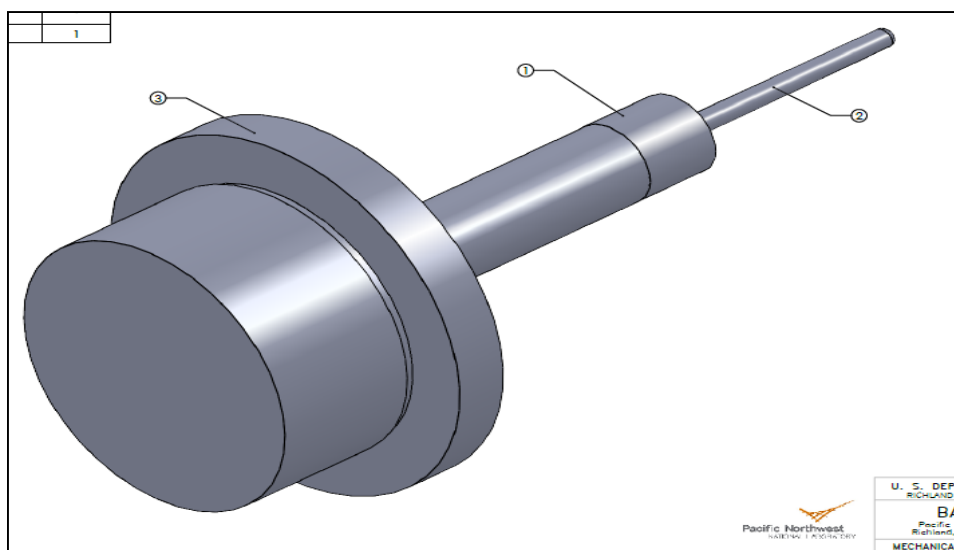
Isometric View of Tooling Being Machined for Annular Extrusions
